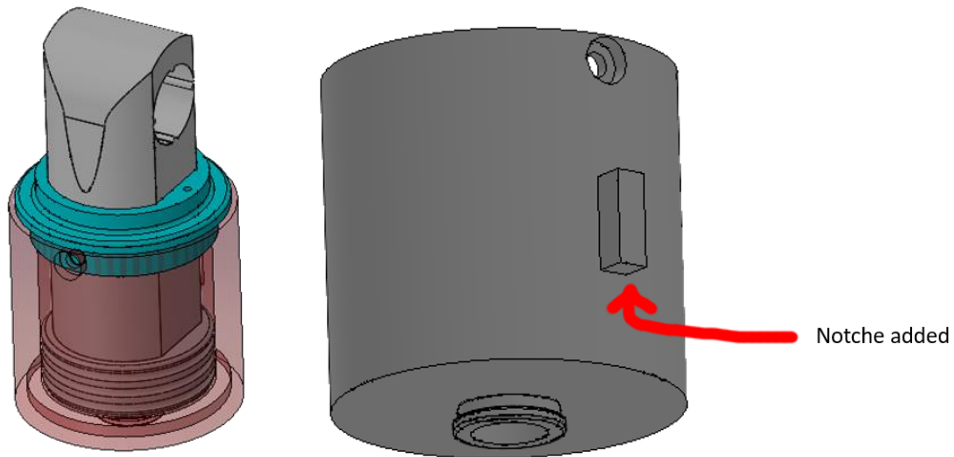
Details of cylinder-cap-piston assembly (left) and notch added to the cylinder (right).
